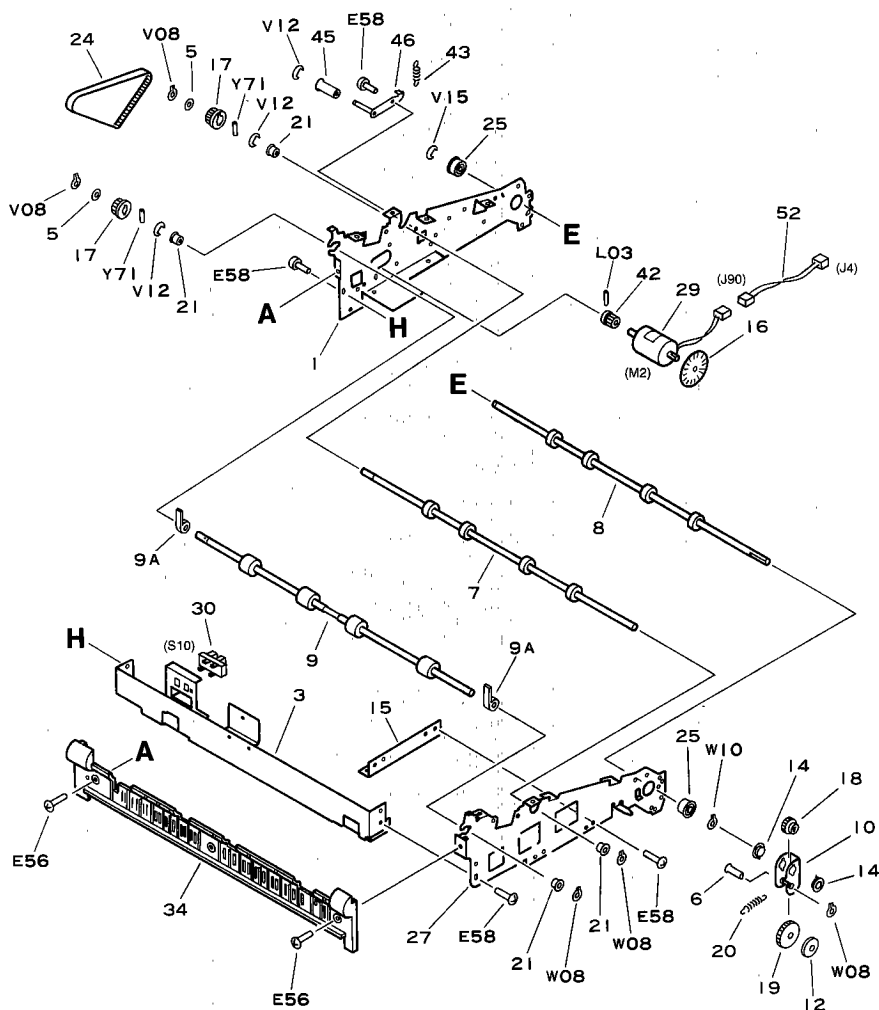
FEEDER RIGHT ASSEMBLY ($\frac{2}{2}$)
